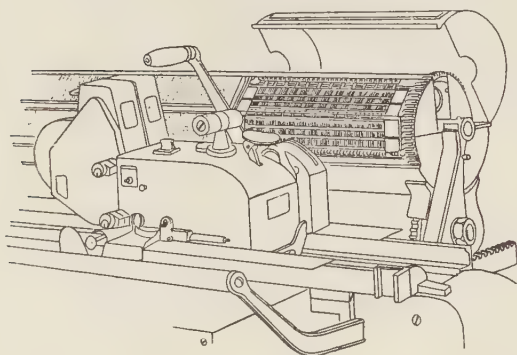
A. E. G. machine — Arrangement of « polygon » and printing carriage.
